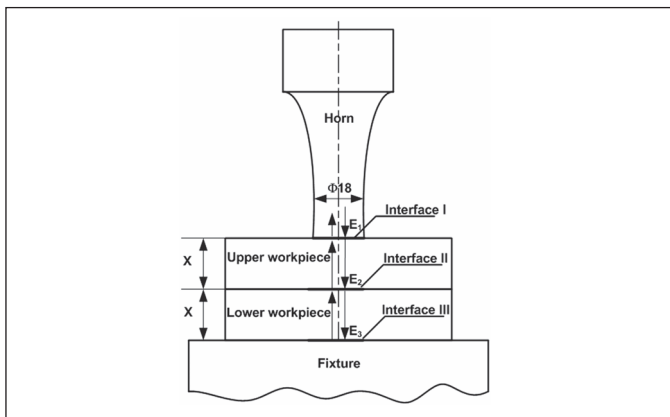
Schematic of the ultrasonic welding process without a horn misalignment (Ref. 20).
